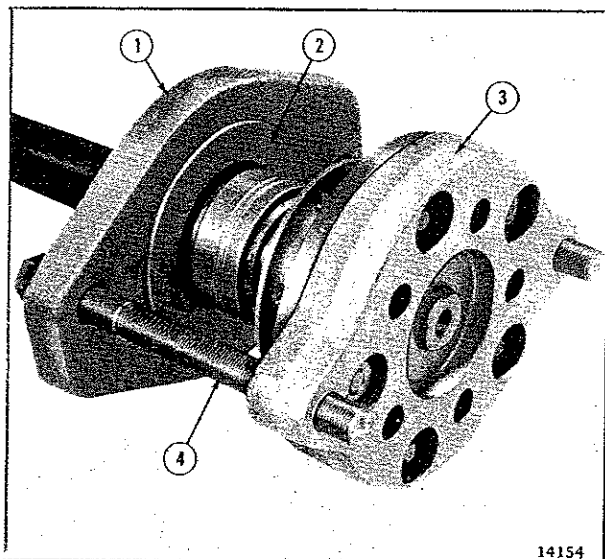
INSTALLING AXLE SHAFT BEARING
